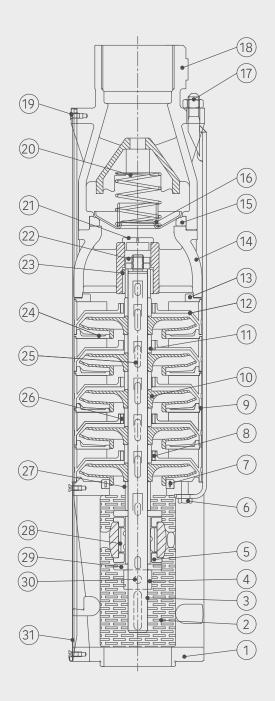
Cross-section view of 6 inch radial flow stainless steel borewell submersible pump
